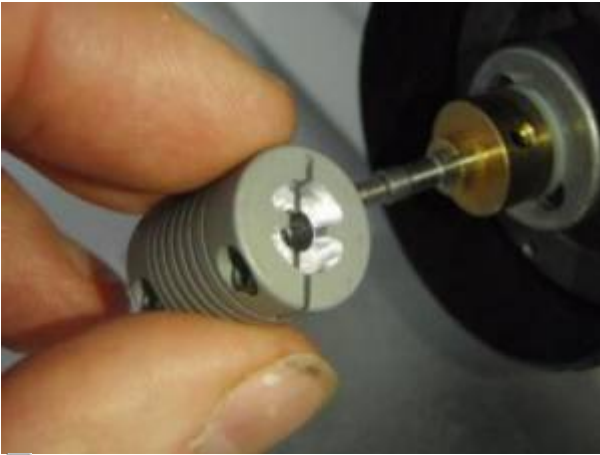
Locate flex adapter & mount so that tabs cut into flex coupler mate with the notches on the brass piece
